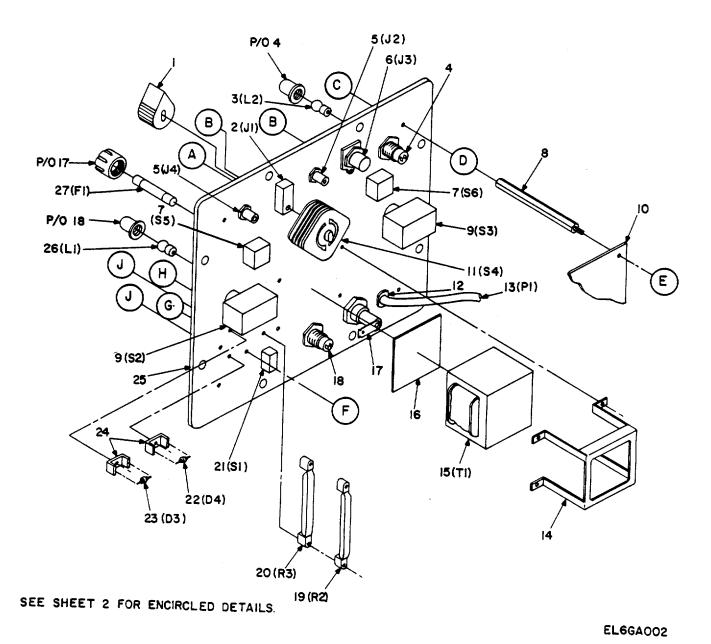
Panel Assembly B4003749 (Sheet 1 of 2).
